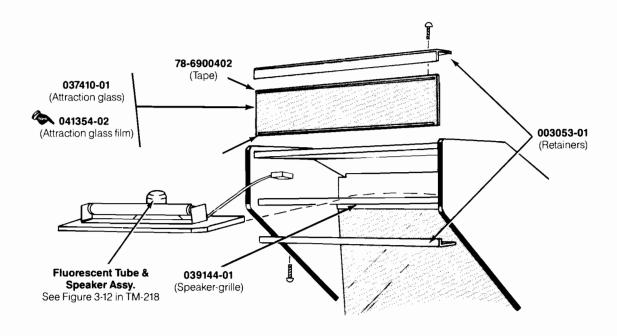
Fluorescent Tube and Speaker Board Parts List
